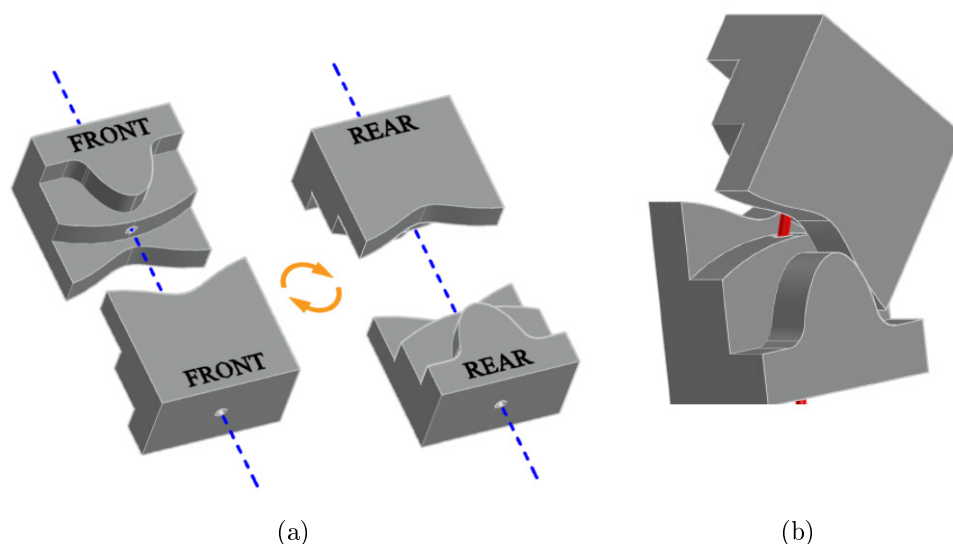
Three dimensional drawing of the smooth contact surfaces. (a) Exploded view of the joint evidencing the conjugate profiles and the pitch lines in two adjacent segments (blue dashed line indicates the cable axis); (b) the actual configuration of the joint, with the exposed portion of cable (in red), after a relative rotation of the segments.
